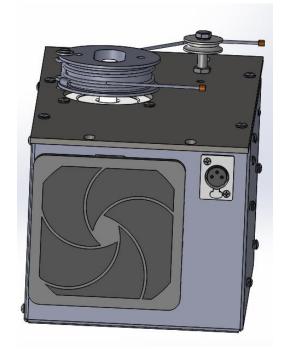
E-Lift Cable Routing (rear view)*Cable Routing (front view)
